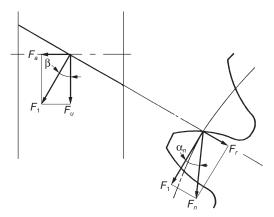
Forces Acting on a Helical Gear Mesh
